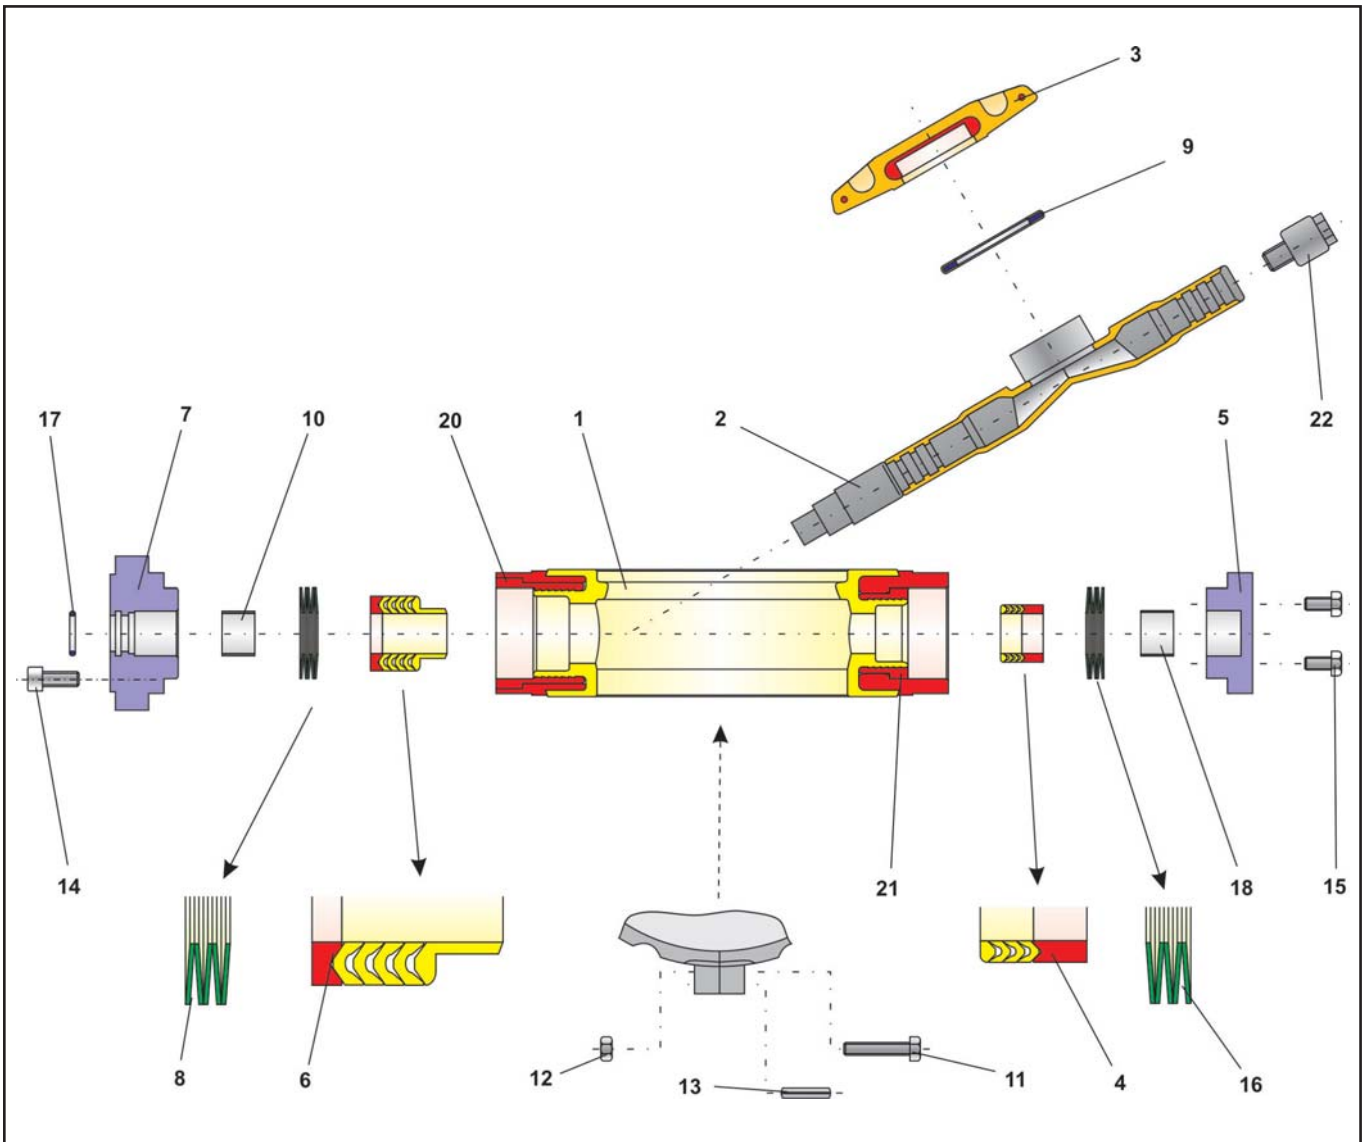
Detail drawing of the control butterfly valve Series 10a
